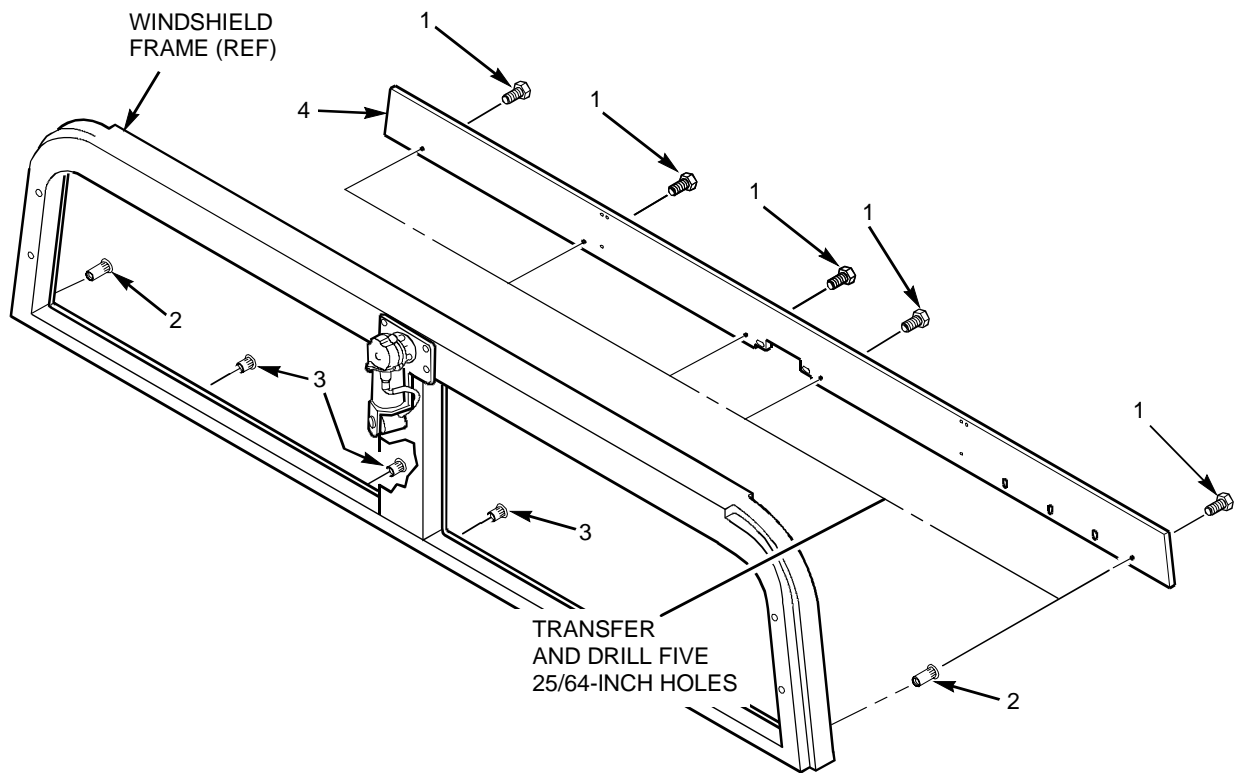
Lower Capping Ring Installation (2 and 4 Door)
